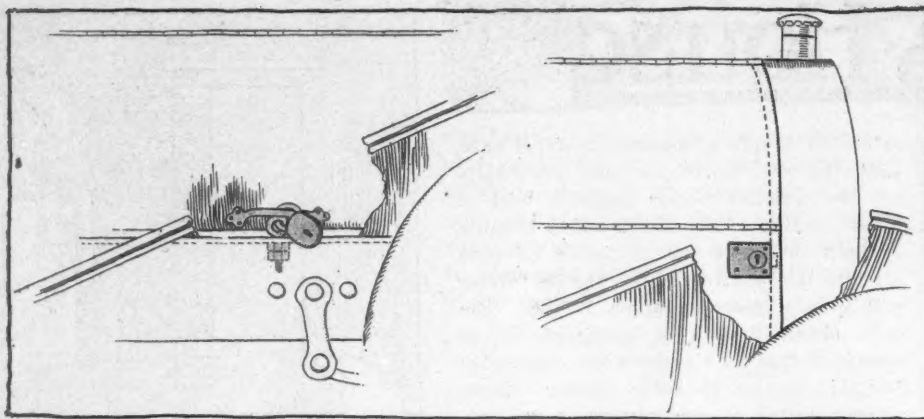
TWO WAYS IN WHICH HOOD MAY BE LOCKED
